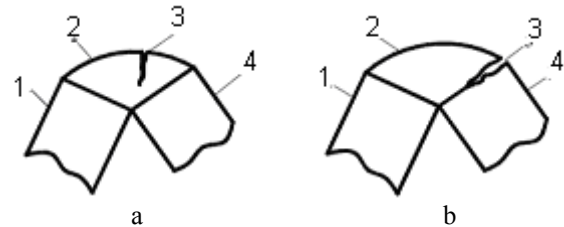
Possible formation of flex cracking of the model: a - crack in the weld, b - crack in the heat-affected zone; 1, 4 - base metal, 2 - weld, 3 - crack
